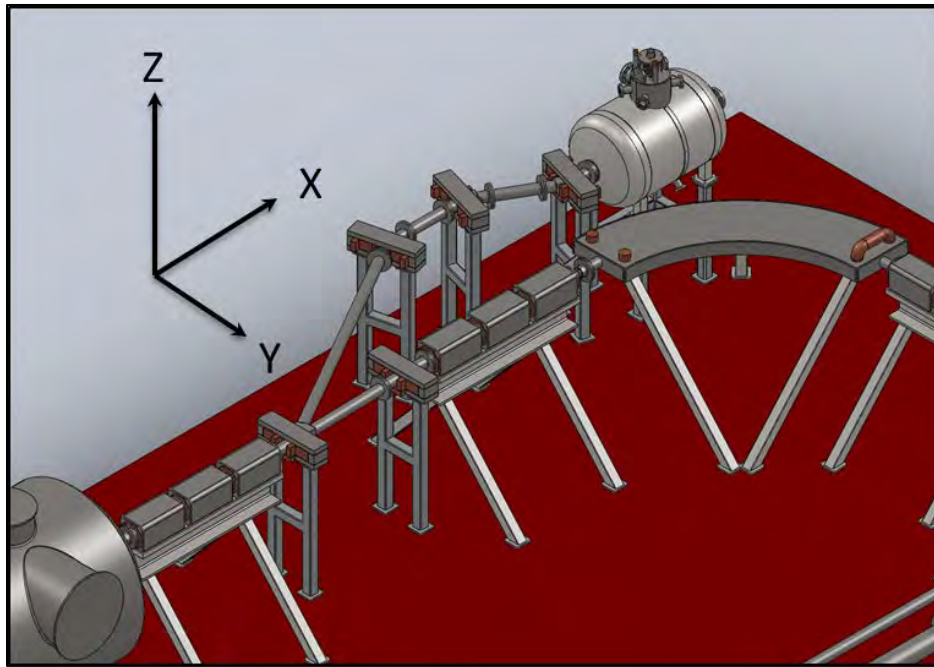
Injector Assembly and Merge into Beam Path. Assembly Consists of Injector Cryogenic Module, Several Dipole Magnets, and Associated Piping.
